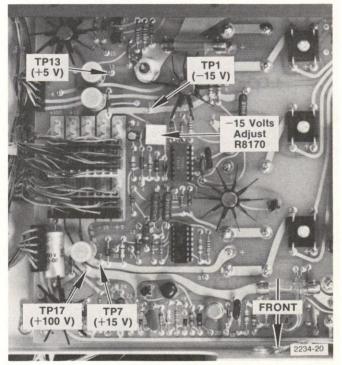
Partial LV & HV Power board showing test point and adjustment locations.
